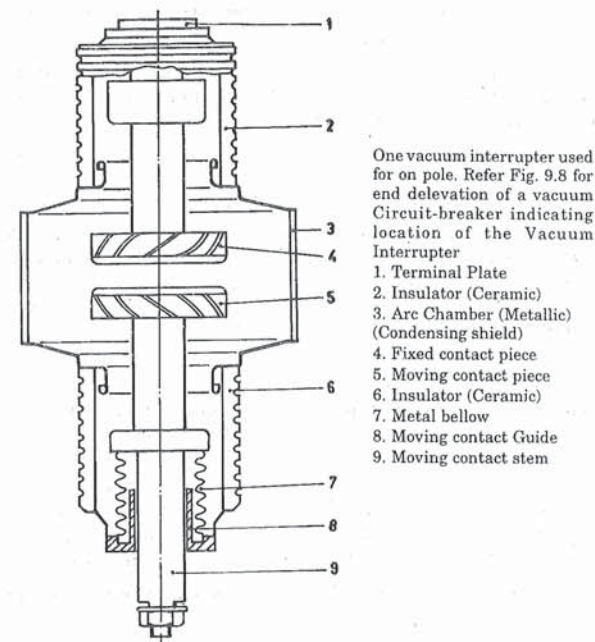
Cross-Sectional View of Vacuum Interrupter
